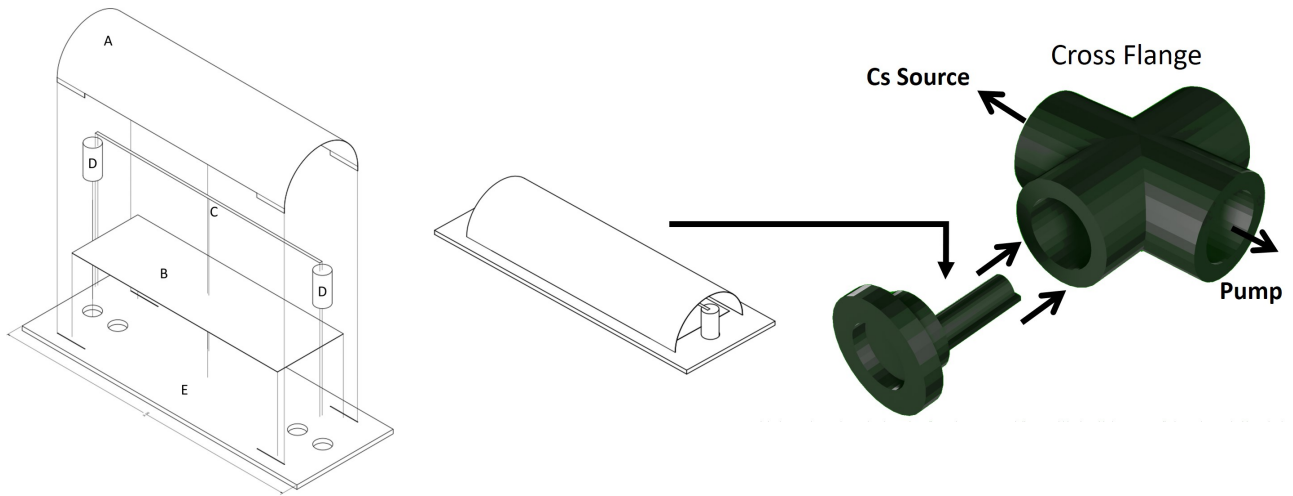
On the left, the exploded assembly of the gauge, on the middle, the assembled gauge, and on the right the positioning of the gauge in the manifold. There are copper wires that were not depicted connecting the cylindrical (A) and flat (B) copper plates, as well as the filament ends, to independent pins in a feedthrough. The filament (C) is connected to screws which act as leads (D). All elements are isolated from each other through ceramic beads and boards like the base ceramic support (E). The copper wires are thick enough to support the structure without it dipping and touching the manifold.
